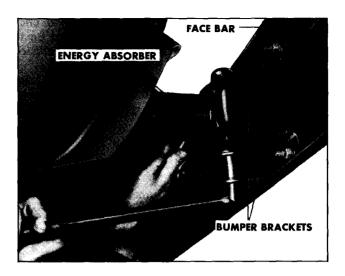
Removing Rear Bumper Bracket Thru-Bolts
